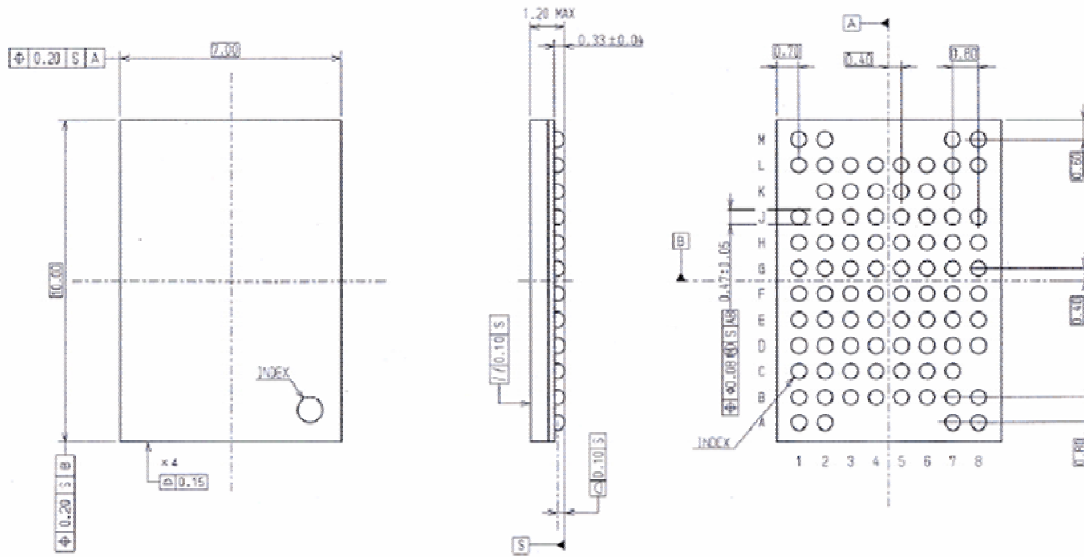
Mechanical Dimensions 7x10 FBGA Package
